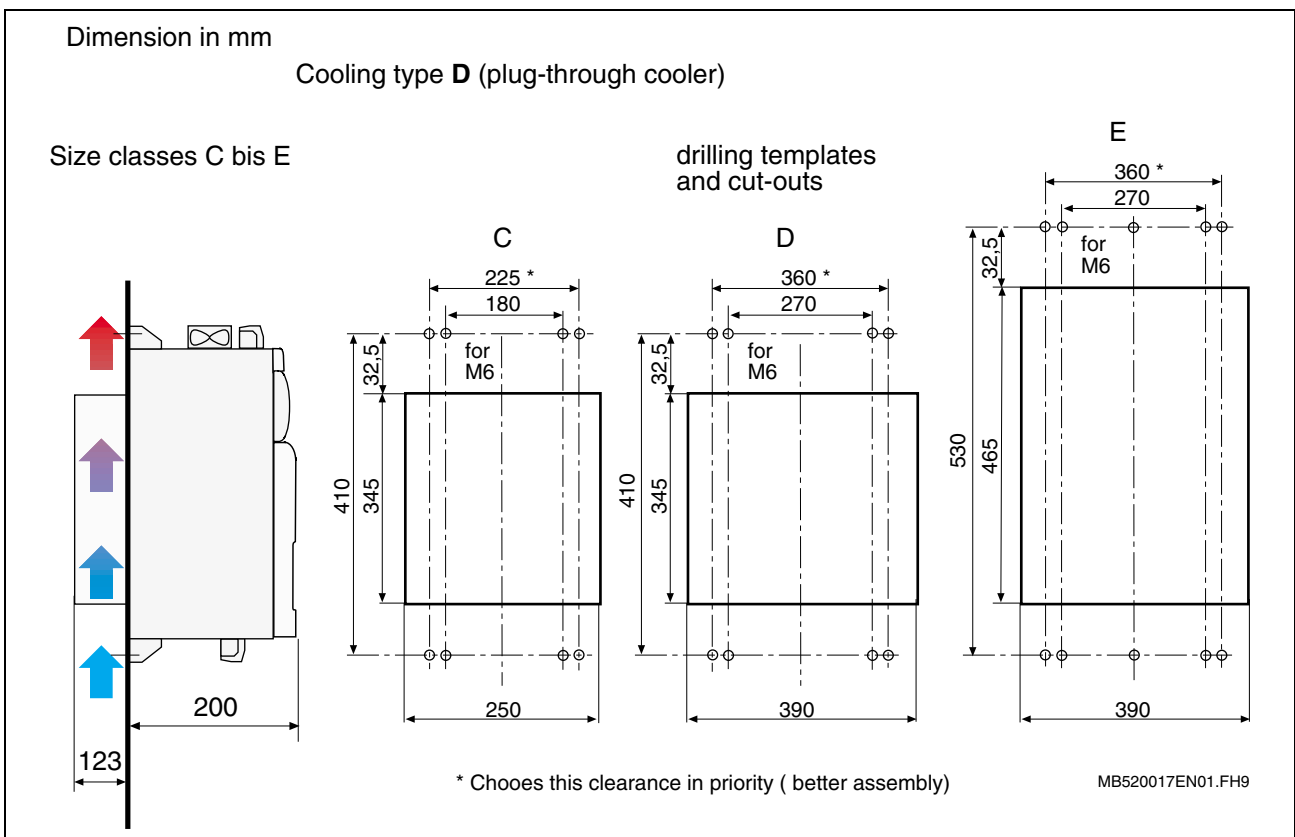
Dimension sheet for cooling type D, size classes C, D, E
